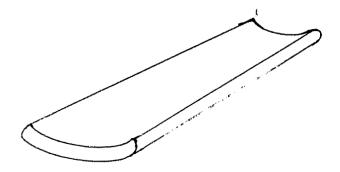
A - COIL-FORM SHAPED HEAT PIPE
